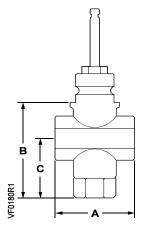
Three-Way Internal Thread NPT × Internal Thread NPT (IT×IT) Valves.
